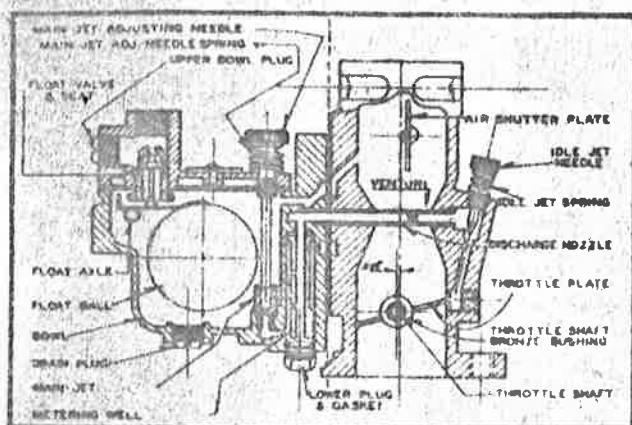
Cross Section of Zenith TU3YI Carburettor used on some OTC-5BH Units.
